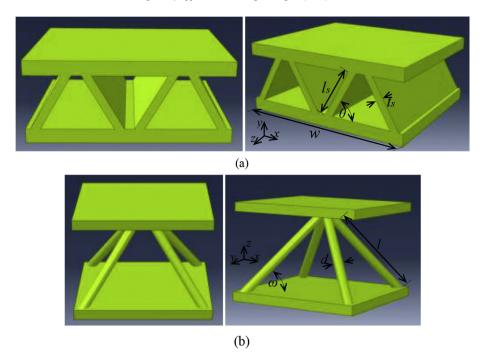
Typical lattice truss material: (a) corrugated planar truss-core sandwich material and (b) 3D lattice truss core sandwich material.
